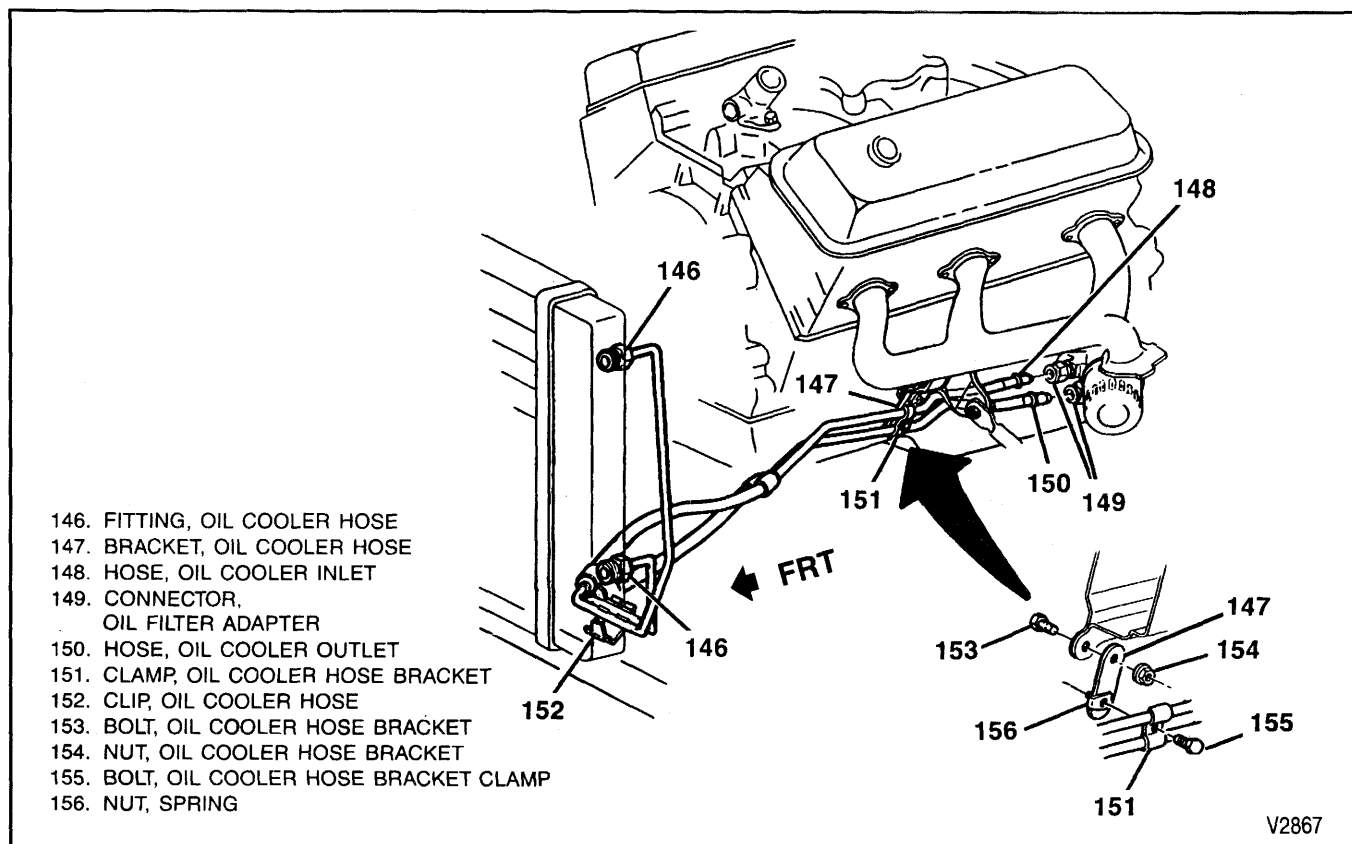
Engine Oil Cooler Lines and Components (4.3L Engine)
